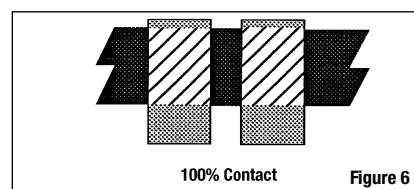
shows the same electrode tip offset slightly on the part, but still contacting 100% of the part width. Both figures 5 and 6 produce equal quality welds.
